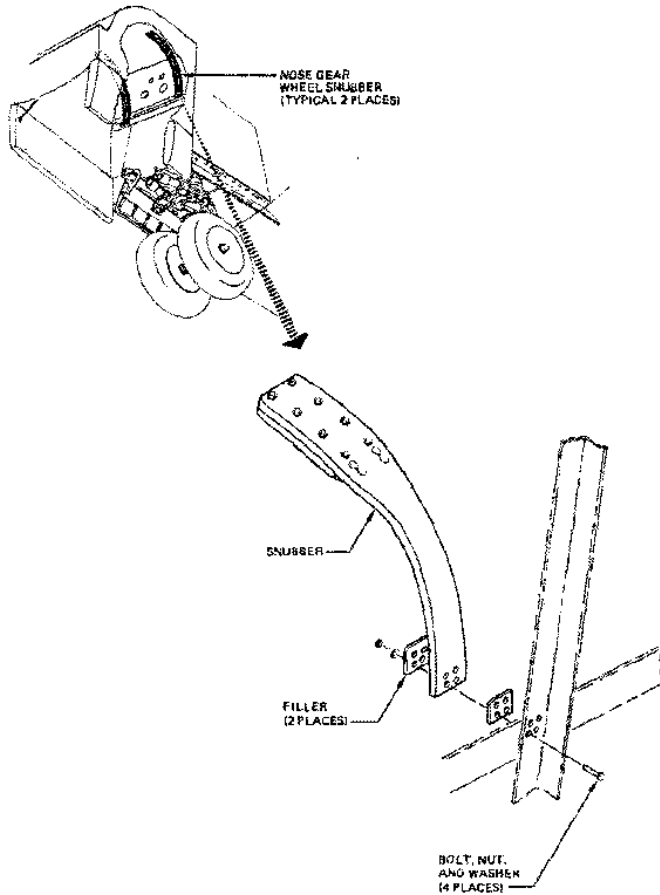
Nose Gear Wheel Snubber Removal/Installation
